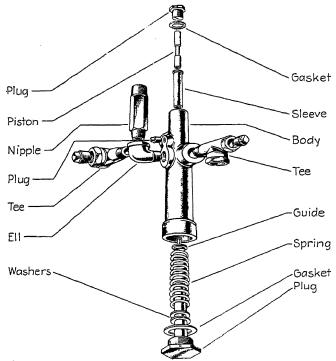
Valve assembly. Flap relief. (Courtesy of Douglas Aircraft Co.) position selected determines the direction of flow of the fluid (Figs. 207 and 224).
